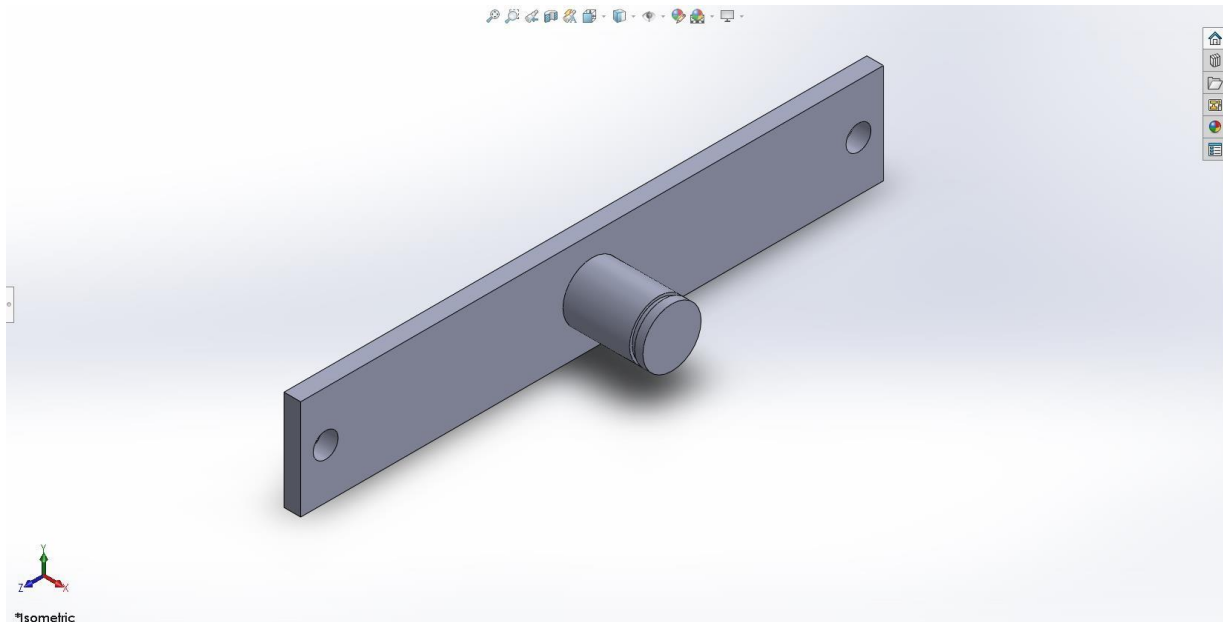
3D View of the front closing strip for the OLED vacuum chamber. The dimensions for the front closing strip are 17.5 mm in length, 3 mm in width, and 0.5 mm in height. It also consists of a single groove of 2 mm depth.
